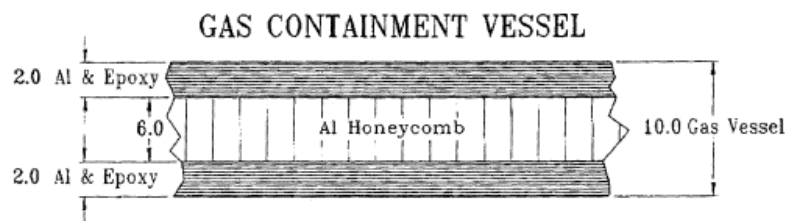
Aluminum gas containment vessel cross section. Dimensions in mm.
